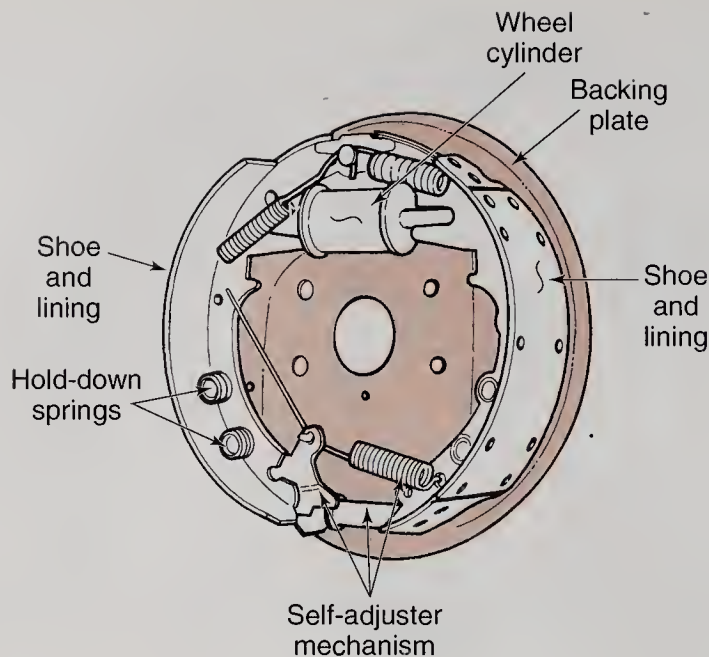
The hydraulic and friction components are mounted on the backing plate.
